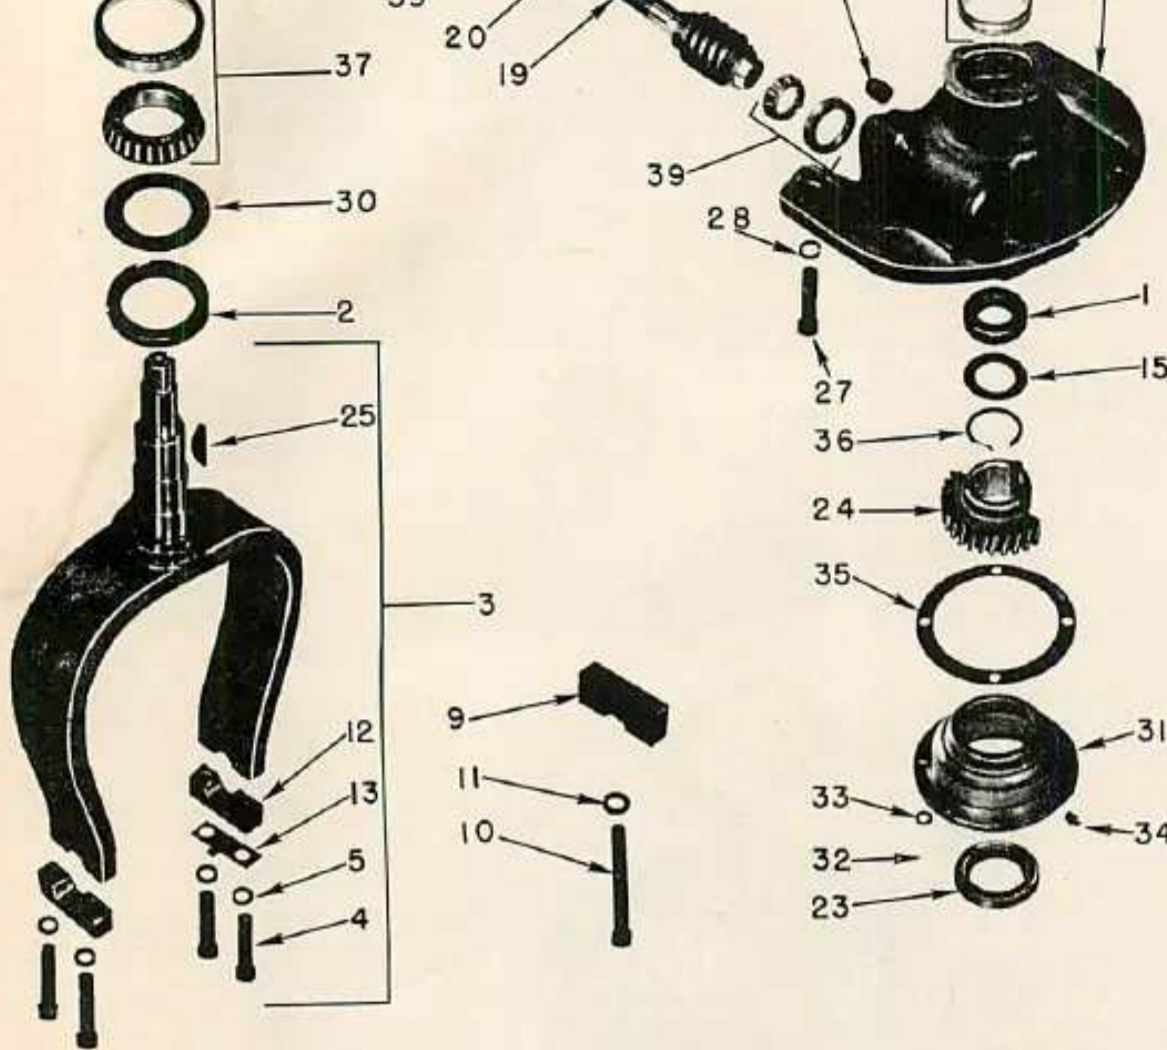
Exploded view of single wheel front support (gear housing) and related parts used on manual steering models. Refer to Fig. O13 for power steering models.
